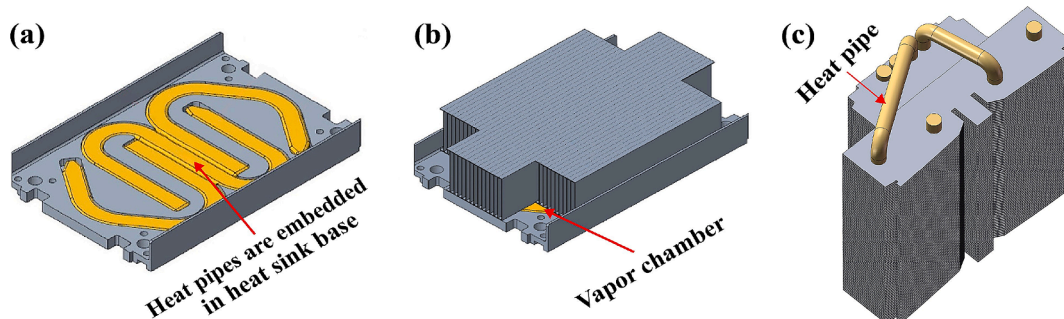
Heat pipes and vapor chamber heat sinks: (a) heat pipe-embedded base heat sink [124], (b) vapor chamber base heat sink [124], (c) heat pipe finned heat sink [125].
